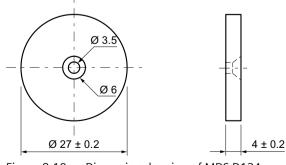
Dimension drawing of MDS D124 All dimensions in mm
